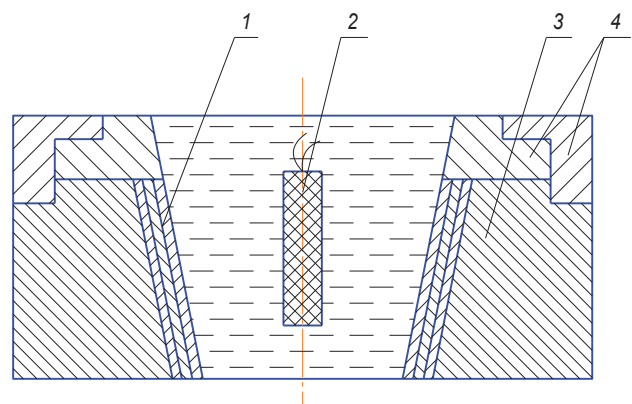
Scheme of compaction with spall elements: 1 - blank stack; 2 - explosive charge; 3 - die; 4 - spall elements
